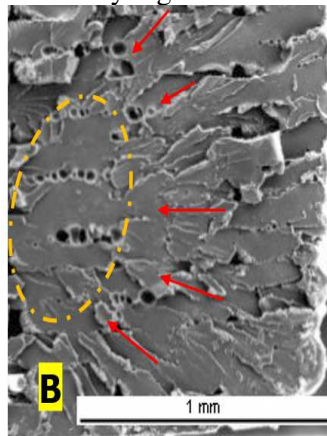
Fracture surface of 0,1 mm specimen
